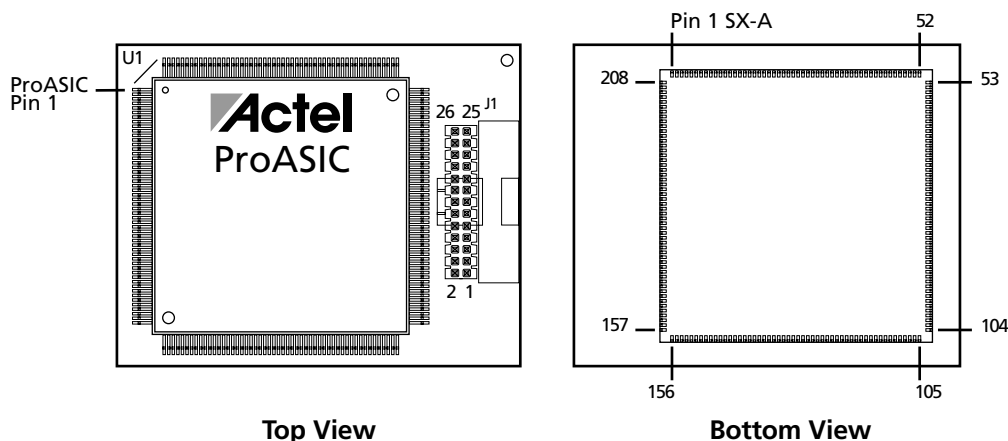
SI-SXA-APAPQ208 Top and Bottom View Drawings
